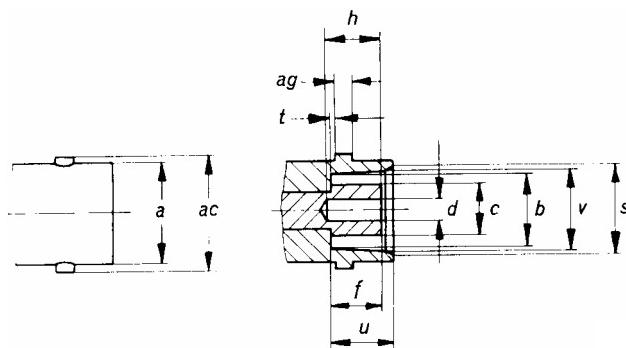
Dimensions of gauge for performance test (see Table 5)
